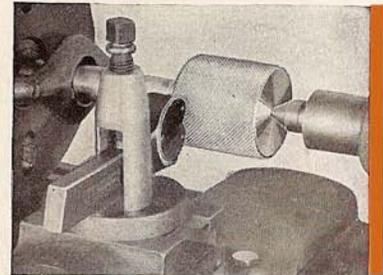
Knurling a Large Handle Mounted Between Centers in the Lathe.
